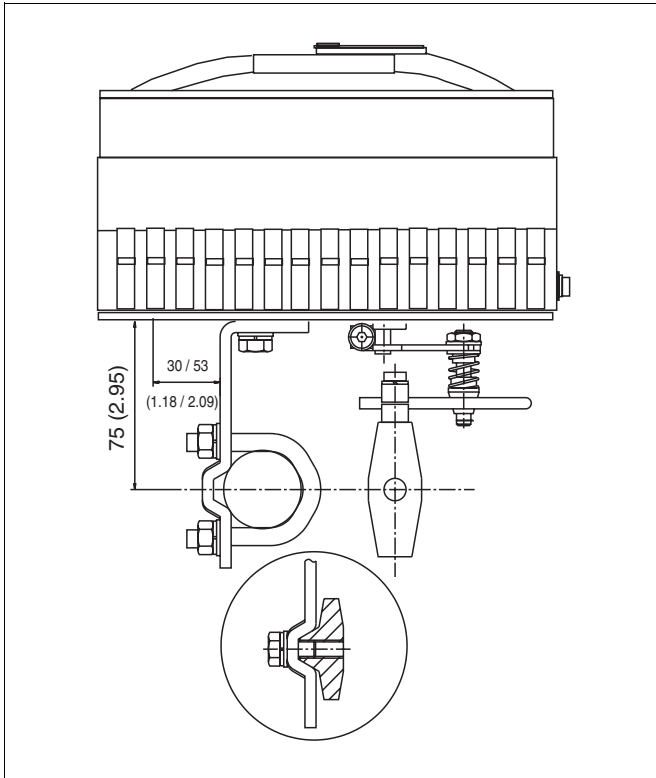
Mounting to linear actuators to DIN/IEC 534
